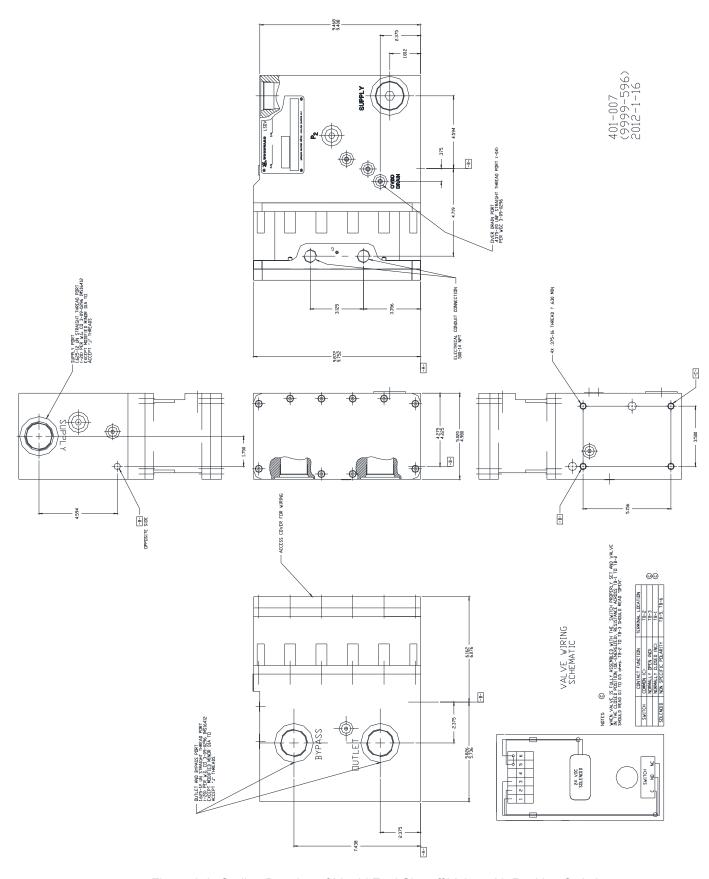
Outline Drawing of Liquid Fuel Shutoff Valve with Position Switch
